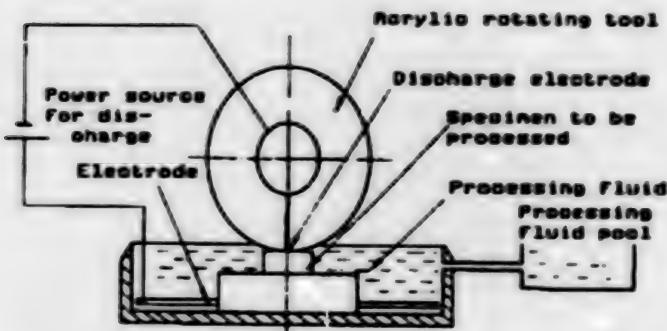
Equipment for Experiments Involving Discharge Removal of Materials Using Rotating Tool
